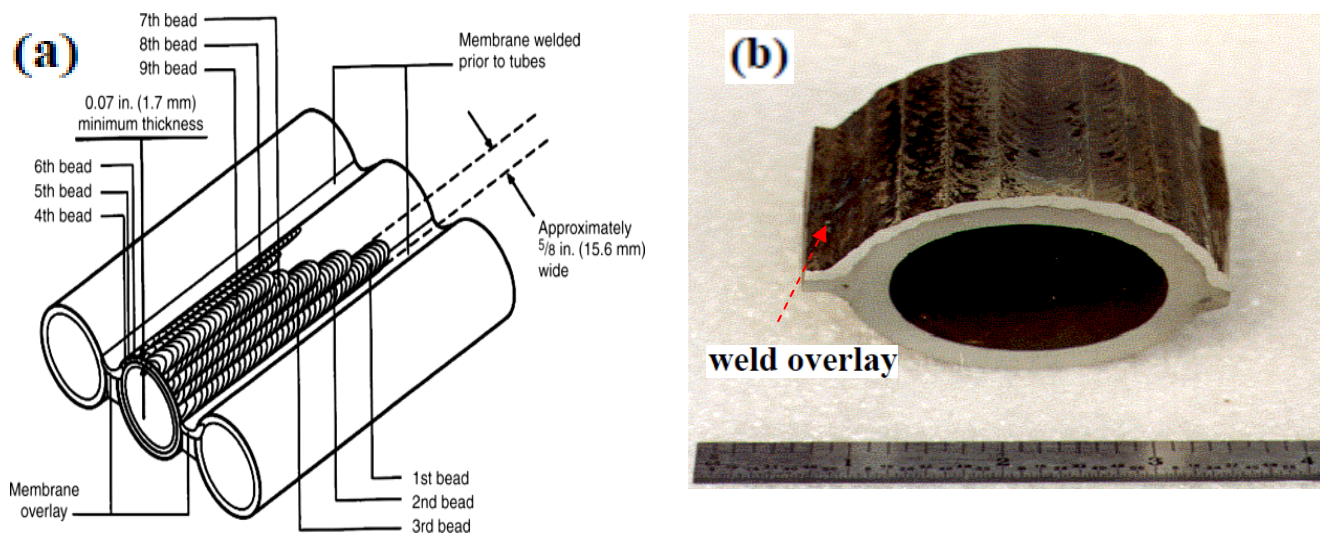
a) Schematic image showing the weld bead sequence in overlaying waterwall of a boiler, b) Cross section of a type 309 stainless steel overlay boiler tube sample, which was obtained from a recovery boiler waterwall [7] .
